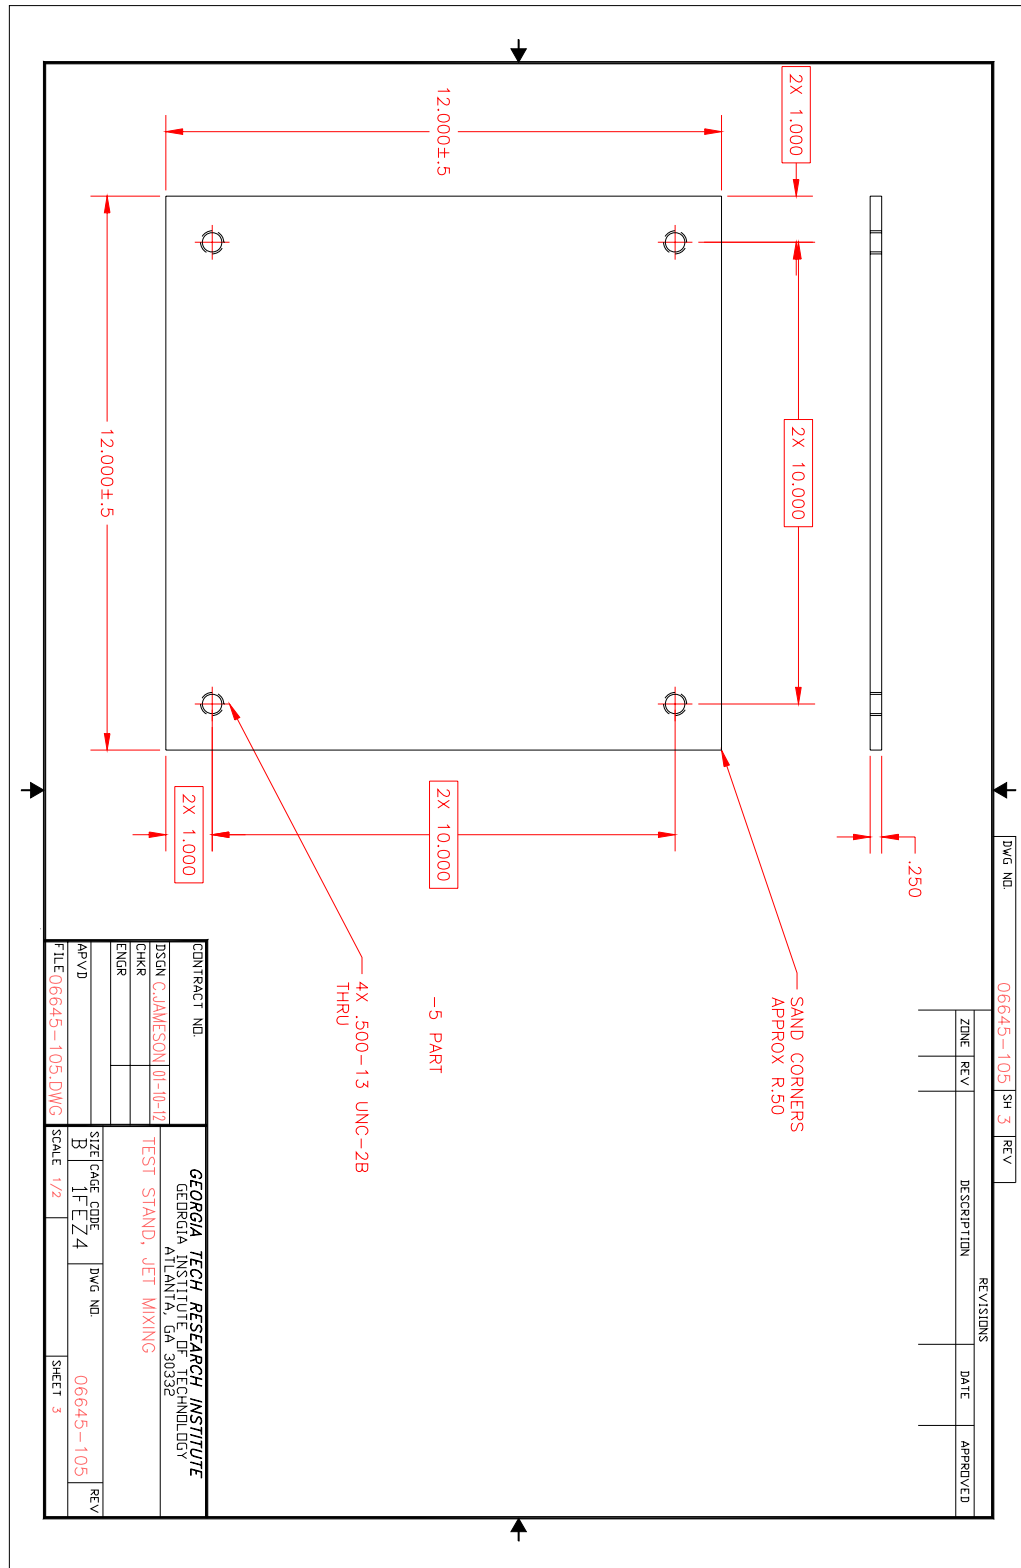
Small Scale Jet, Actuator Test Stand Bottom Plate
